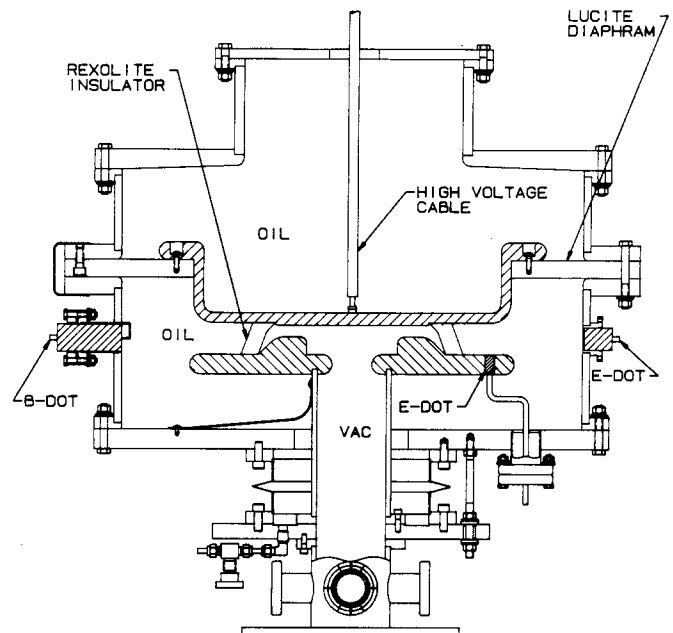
Cross-sectional view of the Mod 1 insulator test chamber.
